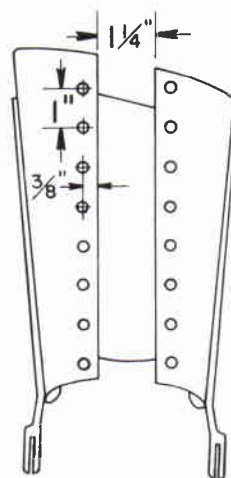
Trimming of front edges of corset, placement of lacing holes in proper position.
